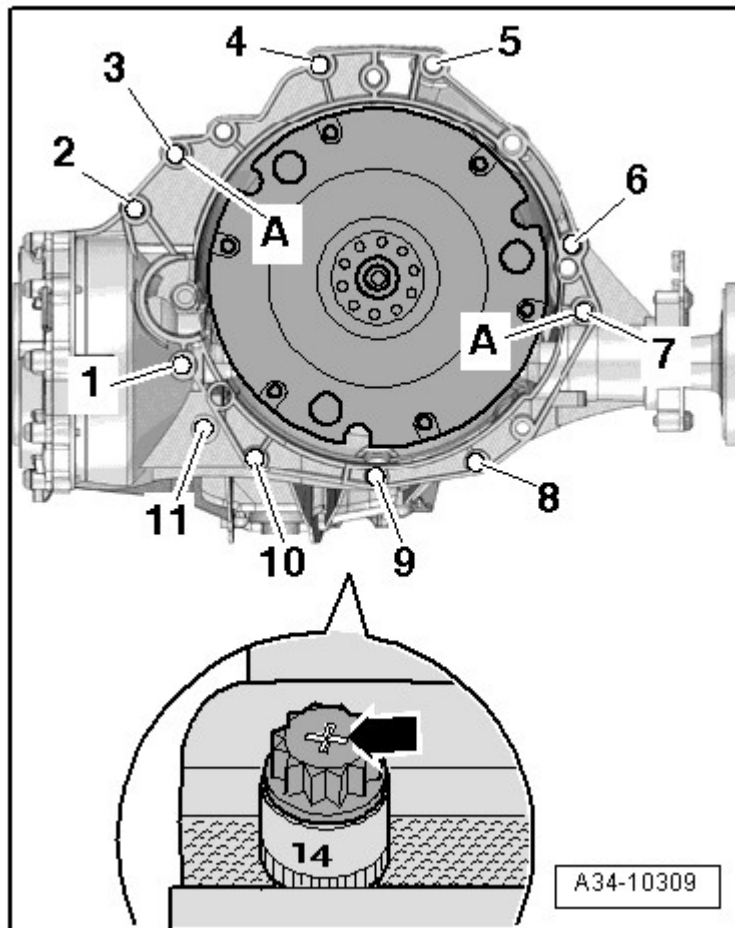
Identifying Bolts Marked With An "X" May Not Be Used Again
